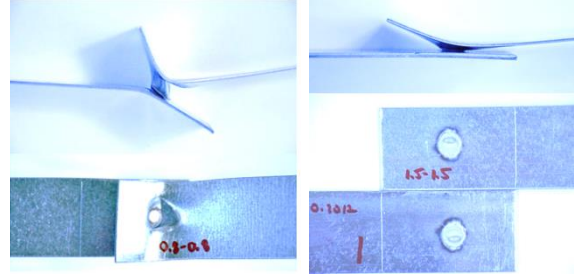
Failure modes of the spot welding specimens: a) full button pull-out, b) interfacial fracture.
